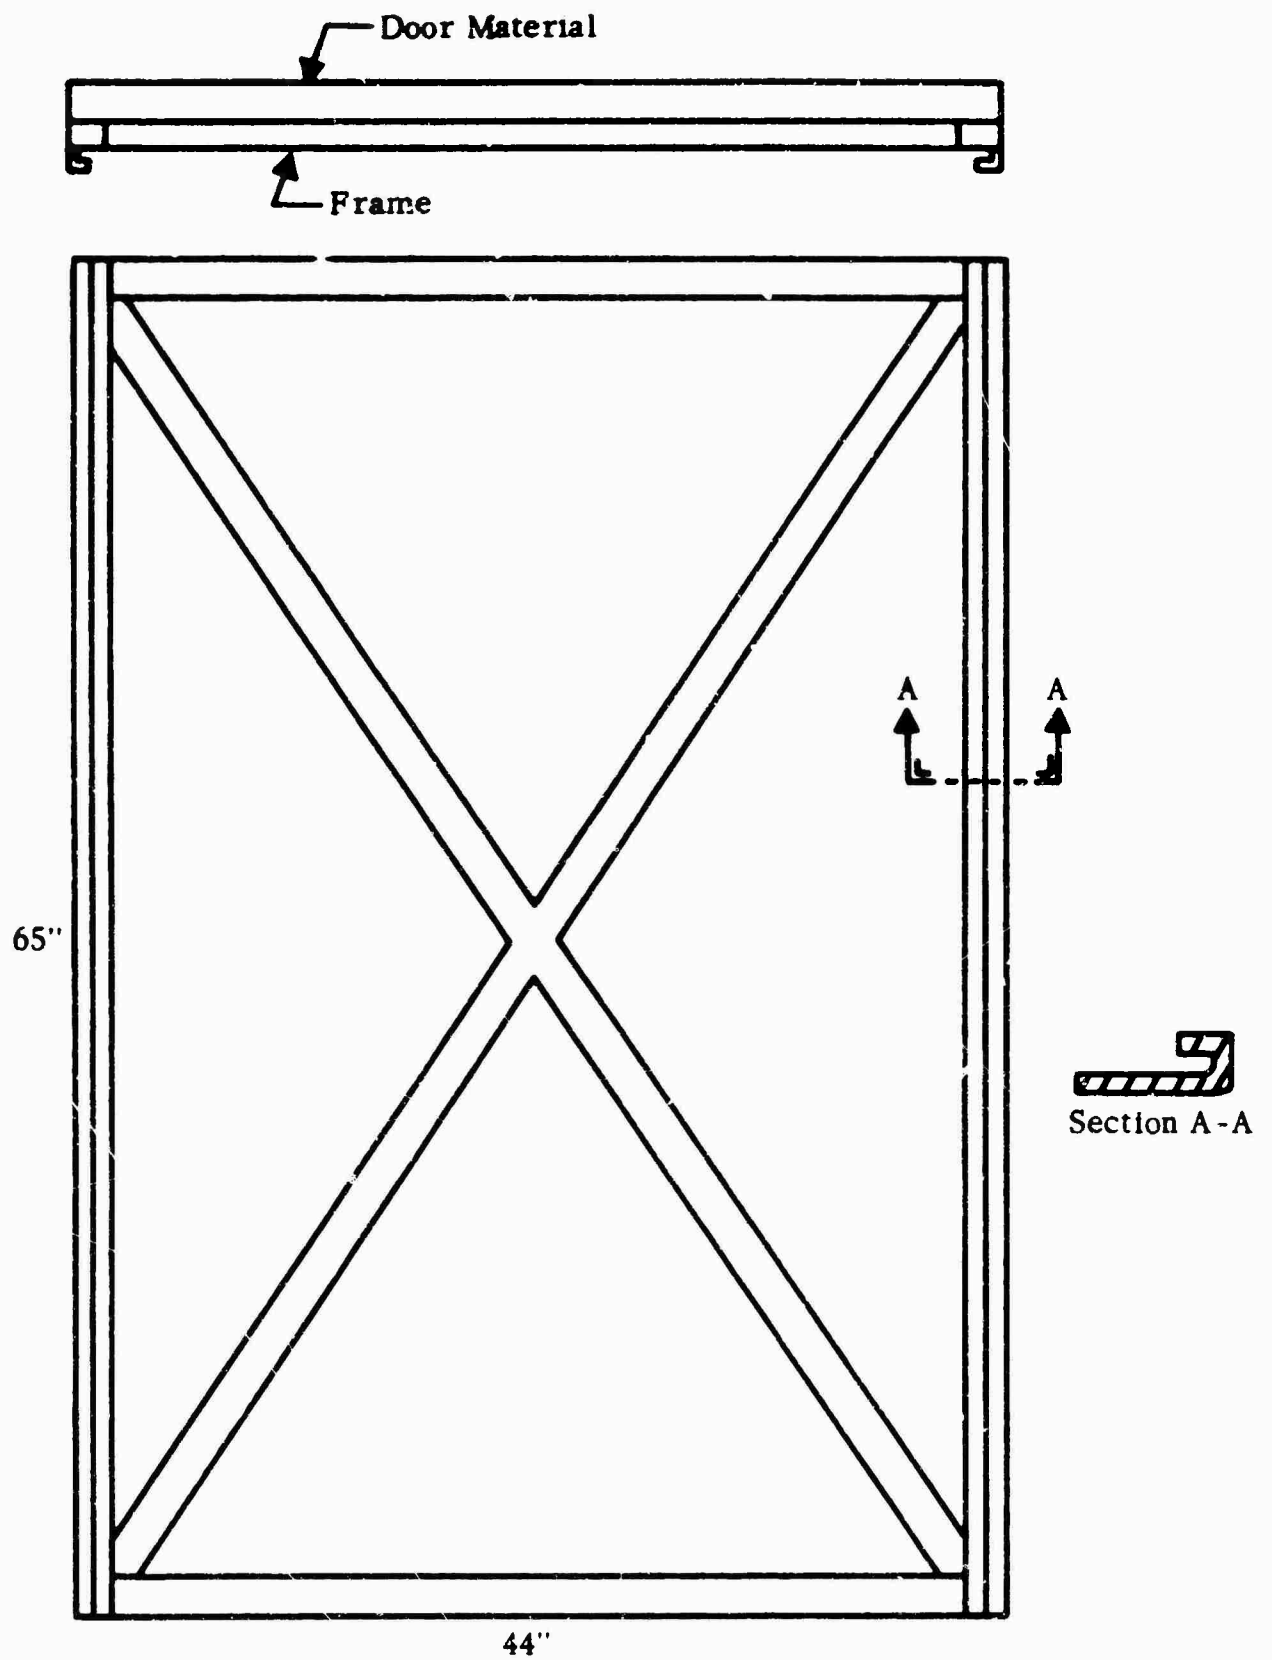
WELDED ALUMINUM DOOR FRAME BONDED WITH ADHESIVE TO DOOR MATERIAL
